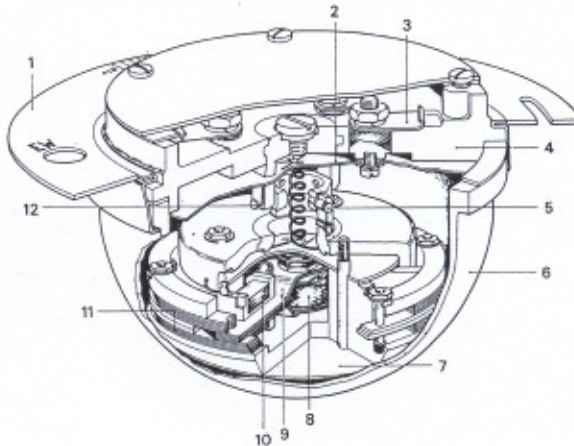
Practical detector element. 1 Mounting flange (ring seal assembly), 2 contact assembly, 3 terminal, 4 cover, 5 pivot, 6 bowl, 7 pendulous weight, 8 primary (excitation) coil, 9 spider leg, 10 secondary coil, 11 collector horns, 12 pivot.
